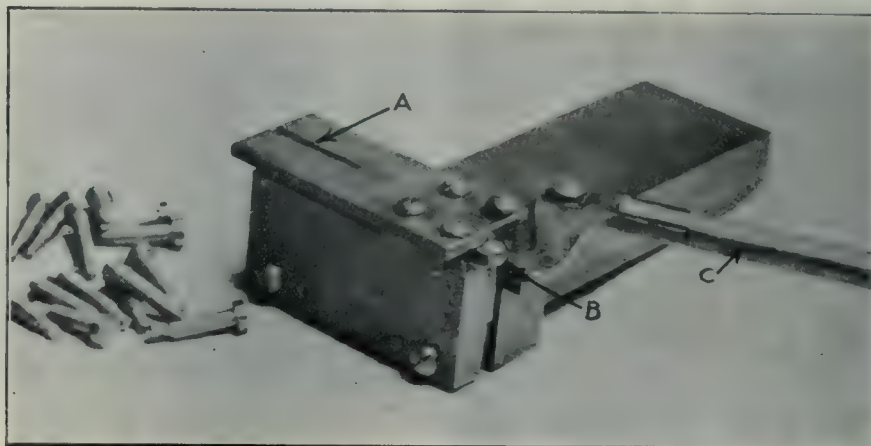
SCREW HEAD SLOTTING FIXTURE.
